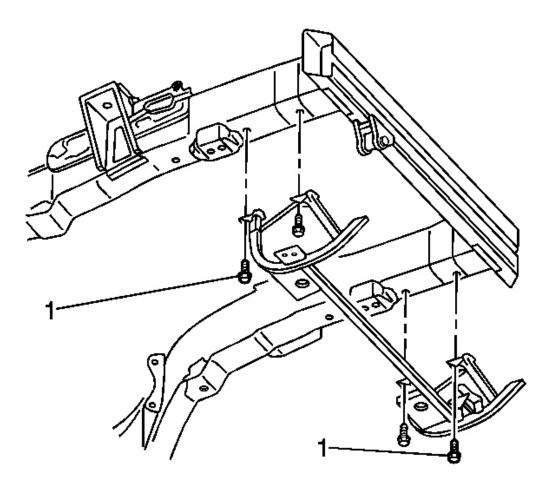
View Of Skid Bar Bolts Courtesy of GENERAL MOTORS CORP.
